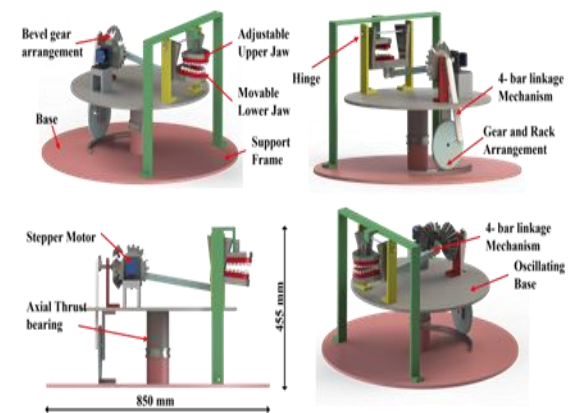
Basic Static CAD model of single motor Masticatory Robot with linkage mechanism
